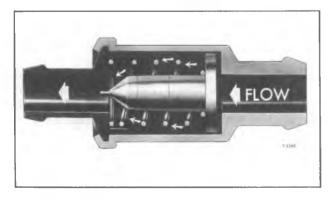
Crankcase Ventilation Valve for In-Line and V8 Engines (Typical)
